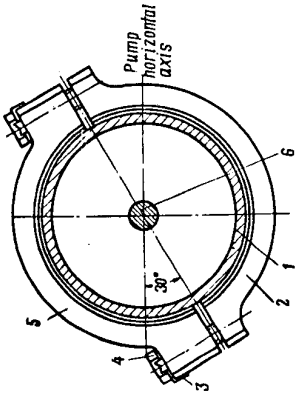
Arrangement of Half-Rings of HP-11A Pump-to-Engine Accessory Drive Gearbox Quick-Release Joint
